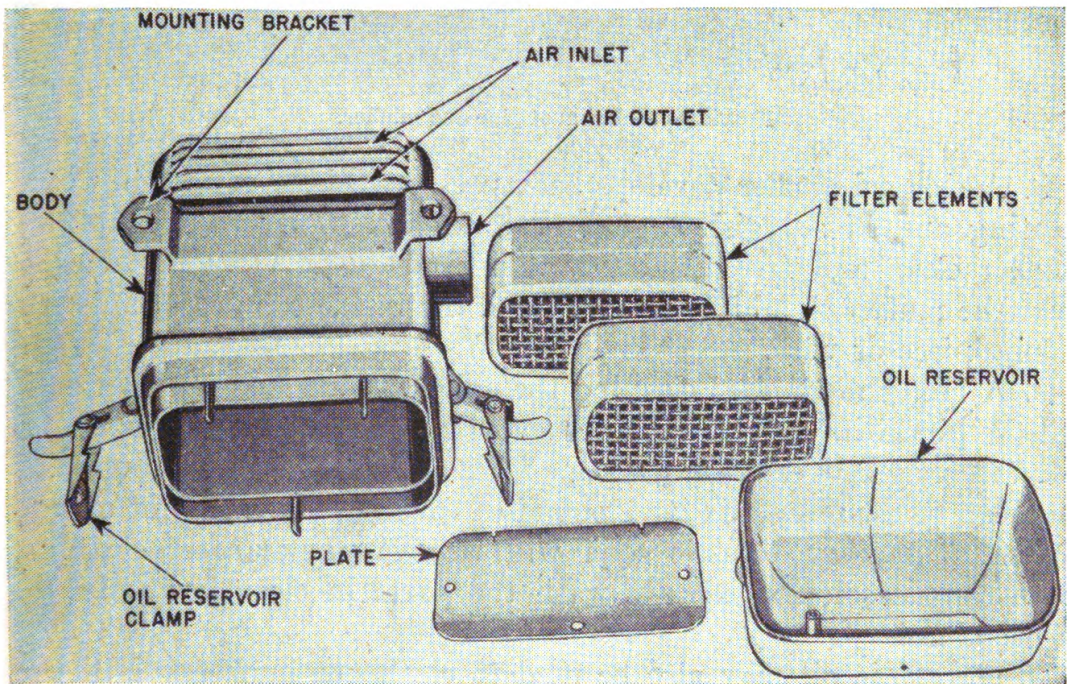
Improved type of oil bath air cleaner, disassembled.
